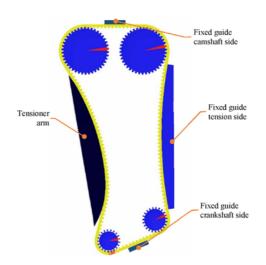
Optimized layout with four guides and 85 N of initial tension.
